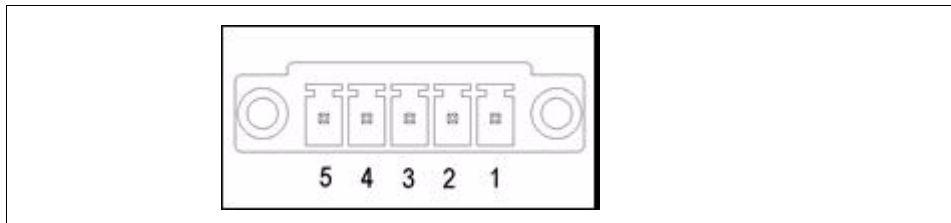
J17 - Control and Brake Supply Connector Pin Layout
